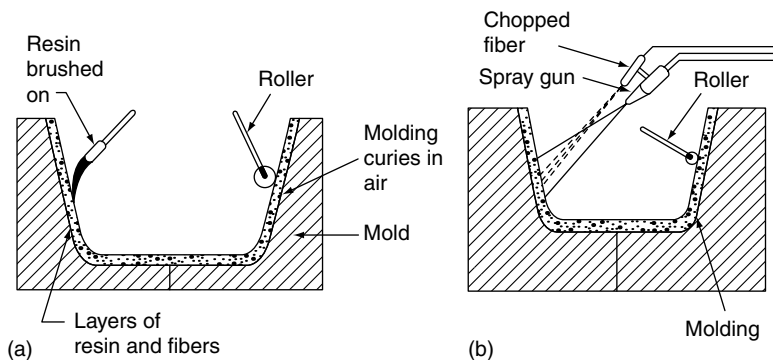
(a) Basic hand lay-up method. (b) Spray-up technique.
